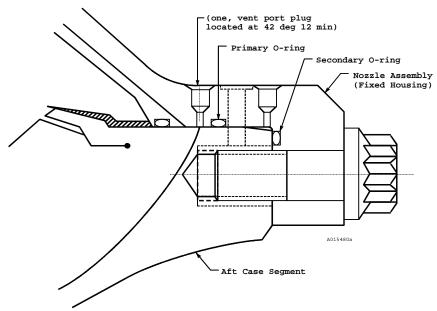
Case-to-Nozzle Joint RSRM Port Plug (Vent Port and Adjustable Vent Port Plug)
